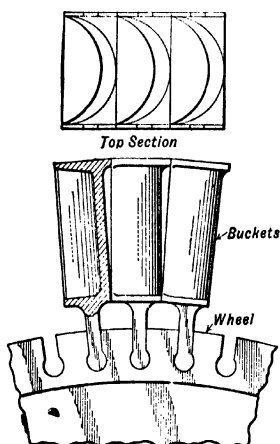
Buckets of De Laval Turbine and Method of attaching to Wheel.
